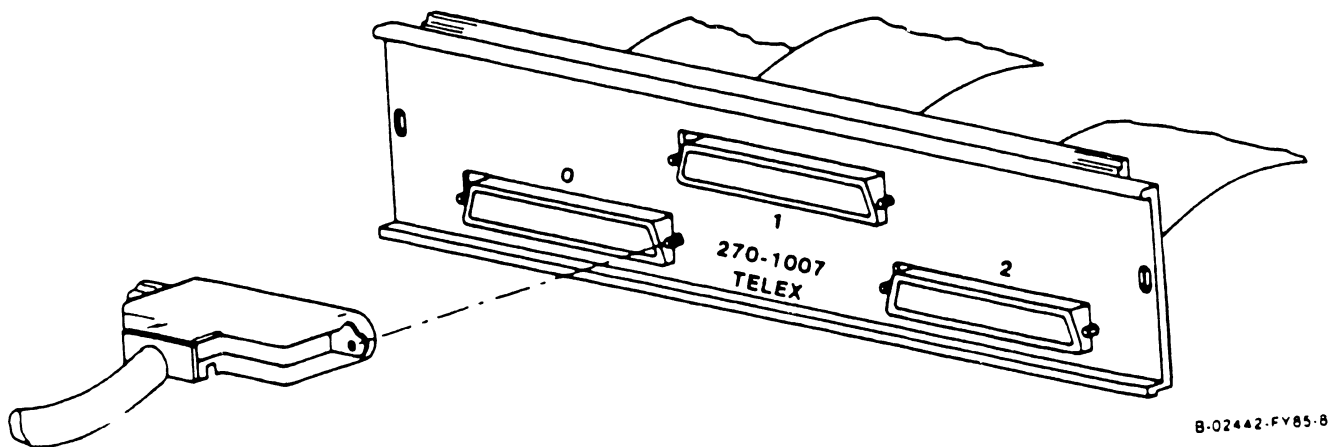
270-1007 Telex Tape Drive Connector Assembly
